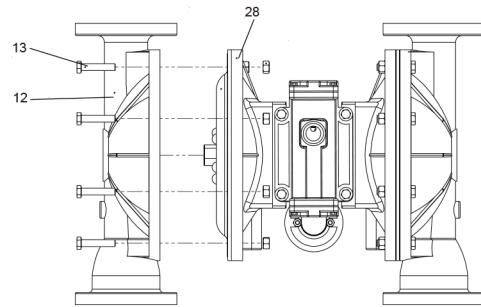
Disassembly of Outer Chamber外腔体拆卸
